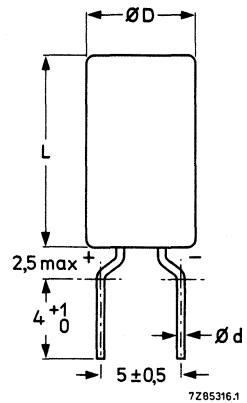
Style 3; case size 11 only; non preferred, see Table 1 for dimensions d, D and L.
